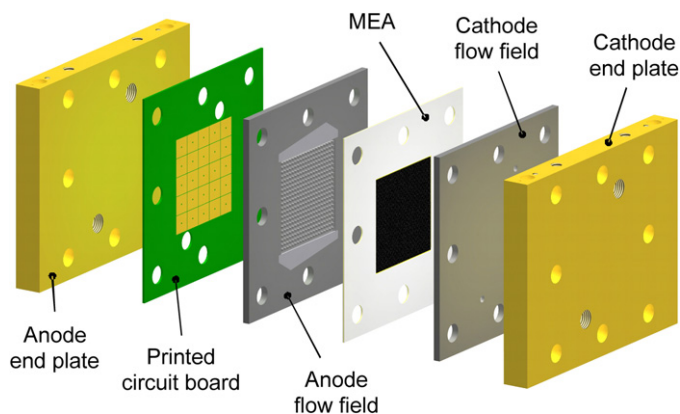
Assembly of test cell. The printed circuit board is inserted between anode end plate and anode flow field.
